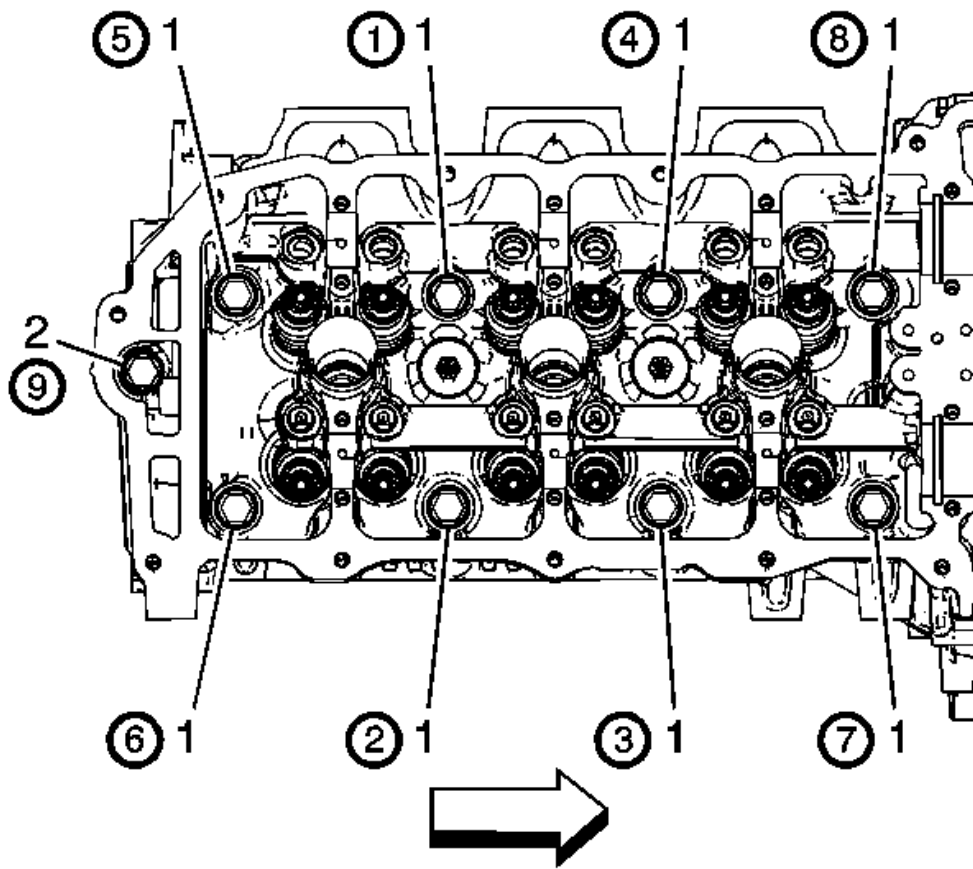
Identifying M11 Cylinder Head Bolts & Tightening Sequence
